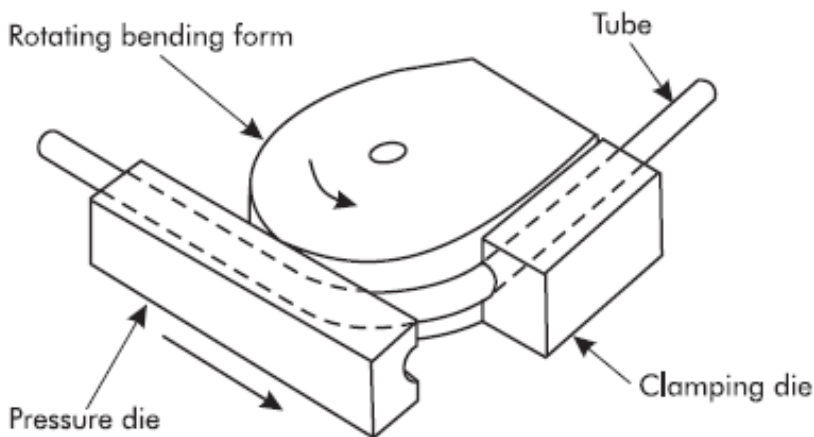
Schematic of Rotary - Draw Bending Process at the end of the test
